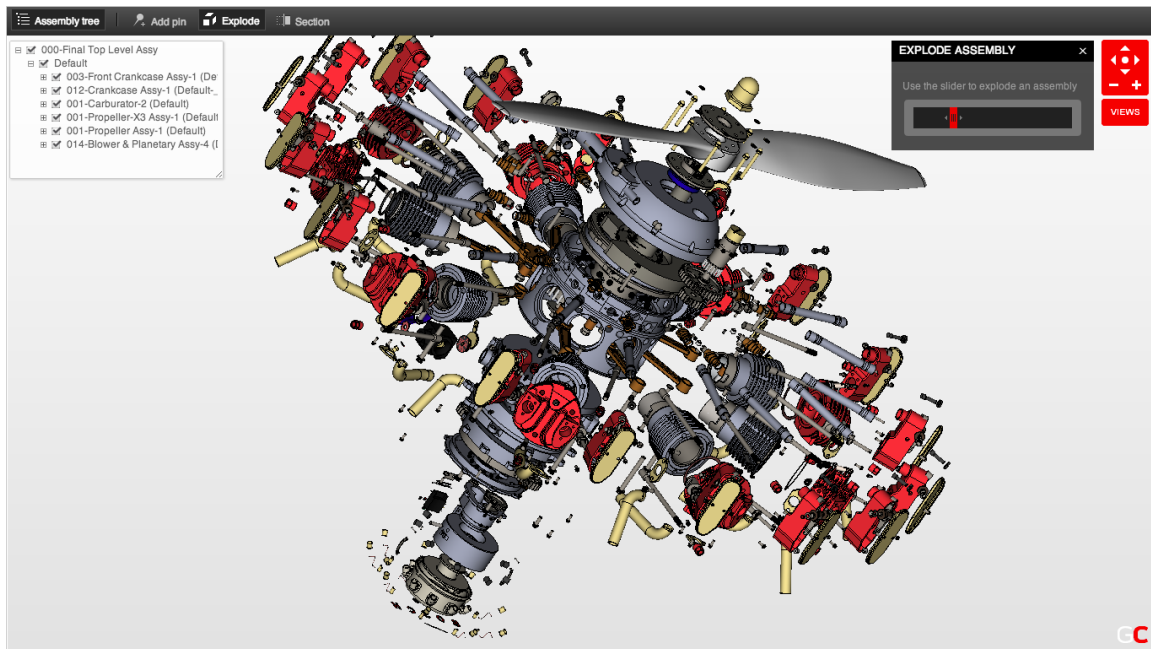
A complex assembly with many constituent parts and sub-assemblies.
